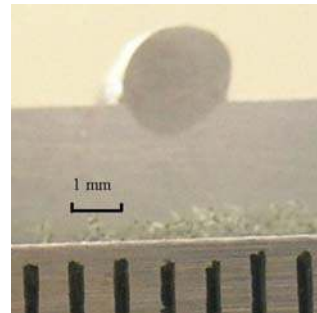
, Weld bead and cross section view of DB-GMAW (Bypass current L&R : 45A-45A)
